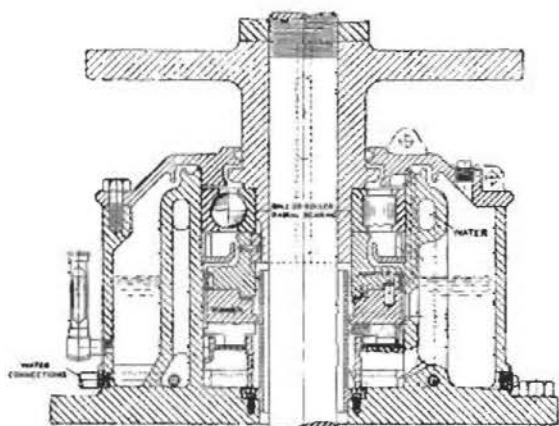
Kingsbury Thrust Bearing combined with ball or roller radial bearing. Water circulation in cored jacket permits high speed. STANDARDIZED: See Bulletin M.
